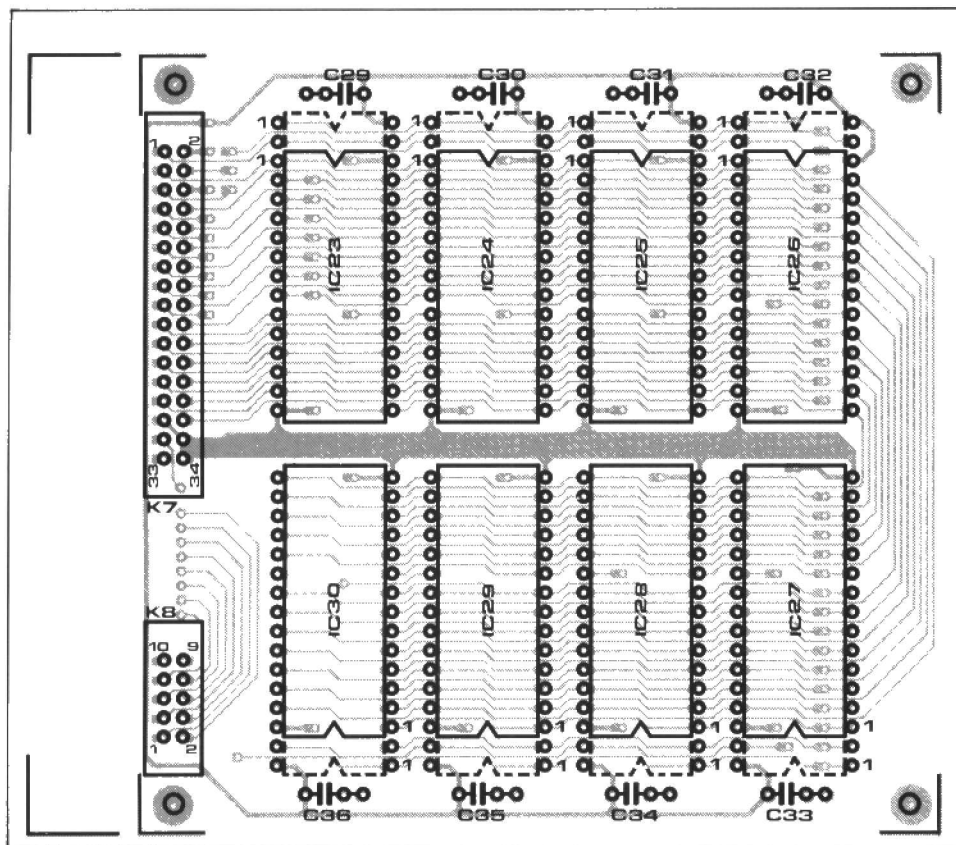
Component mounting plan of the memory extension board. Depending on the memory configuration, 10-way header K8 is connected to K1, K2 or K3 on the main board.
